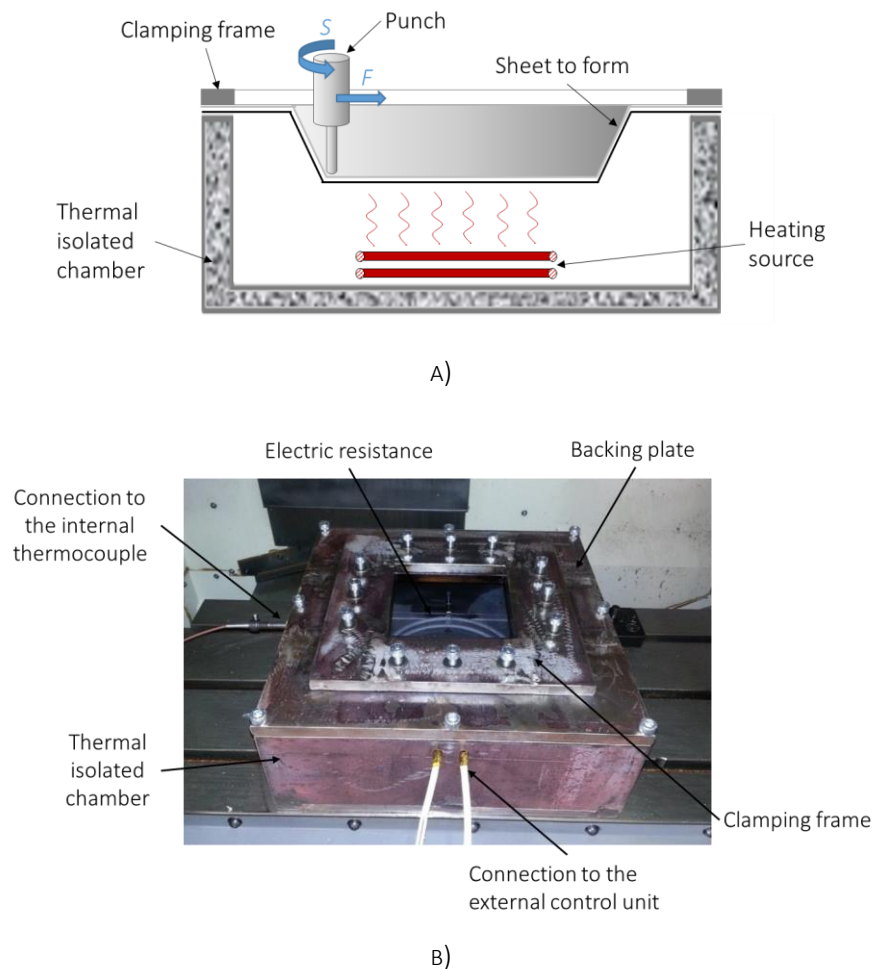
A) A SCHEMATIC OF THE PERFORMED SPIF PROCESS AND B) THE MANUFACTURED EQUIPMENT
